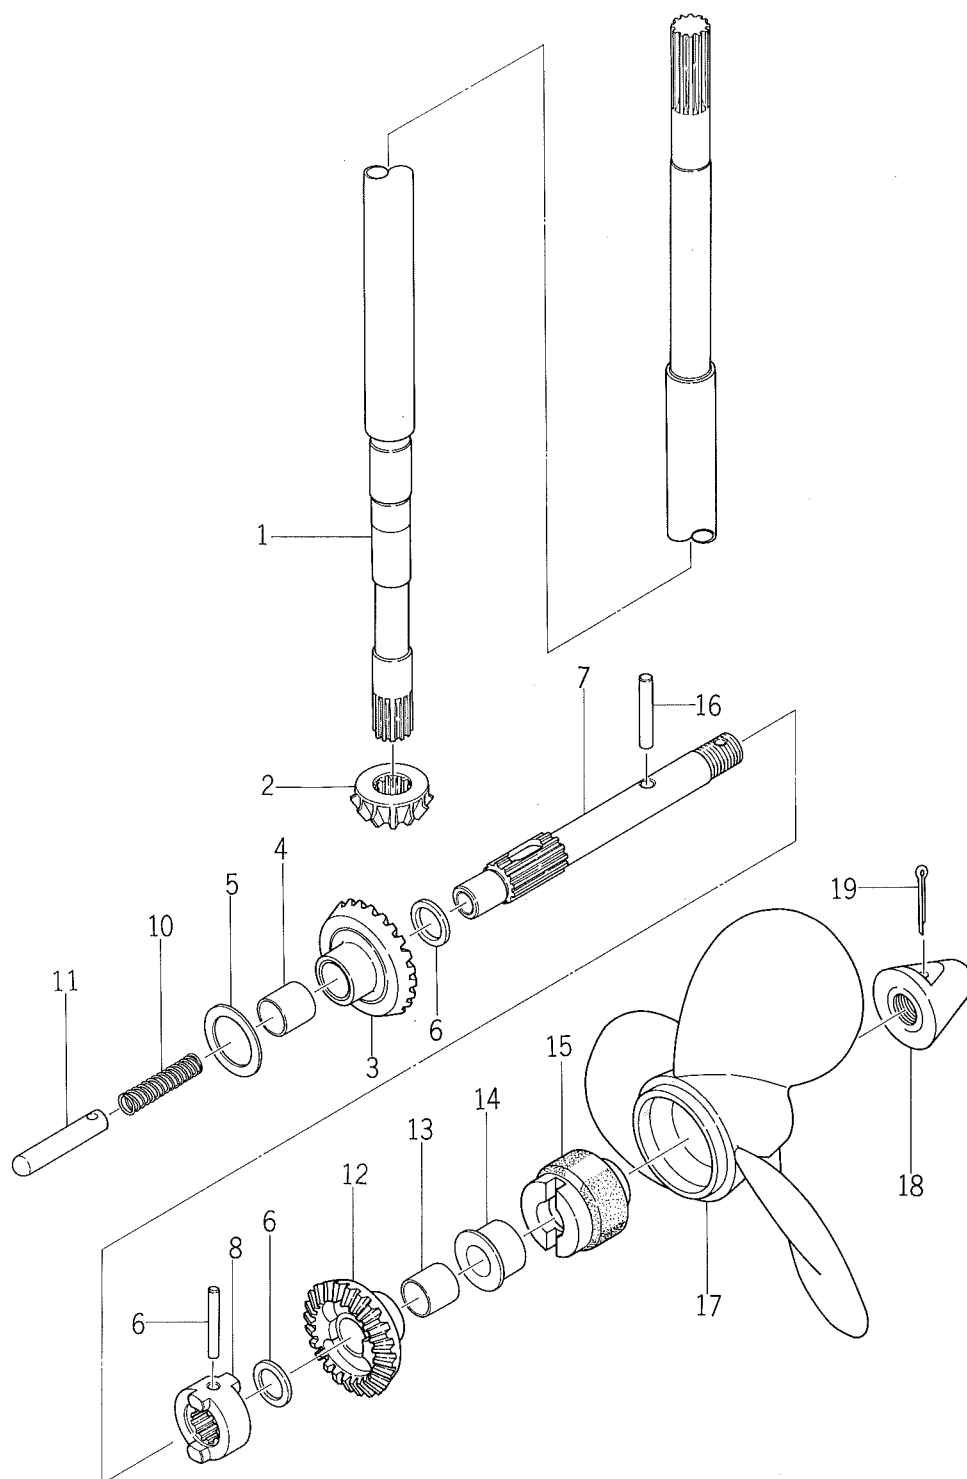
DRIVE SHAFT HOUSING, GEAR CASE
